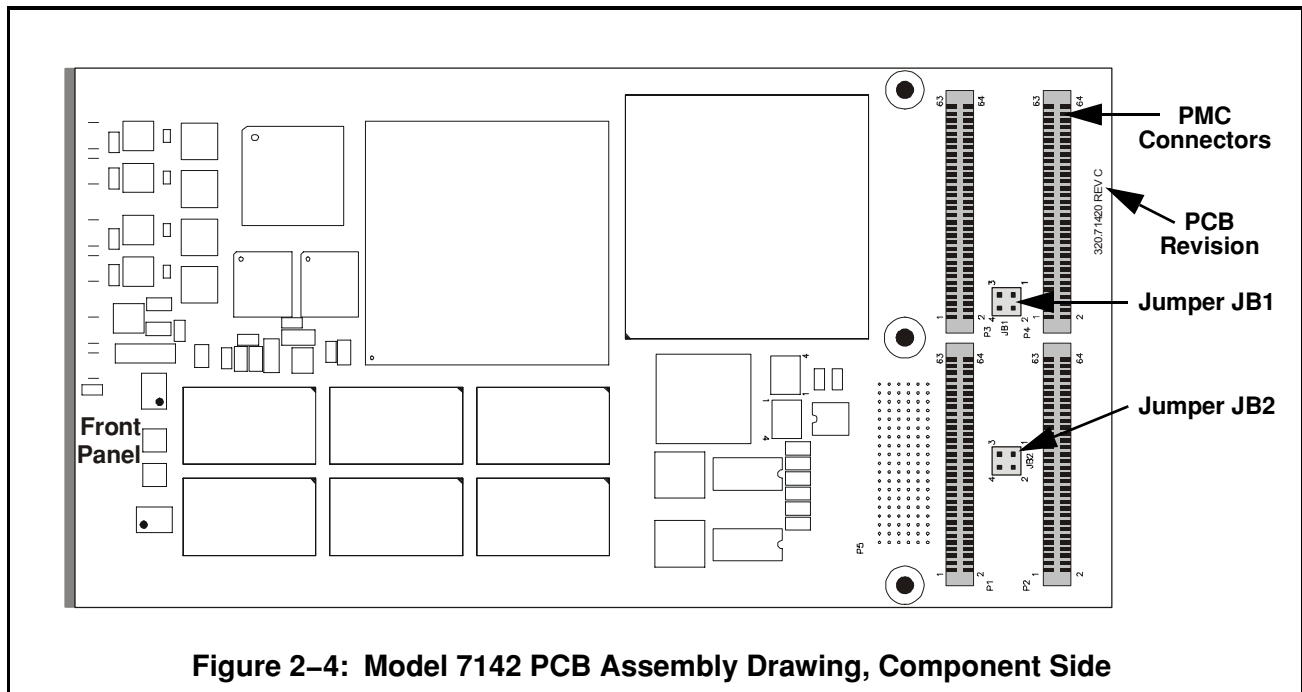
Model 7142 PCB Assembly Drawing, Component Side
